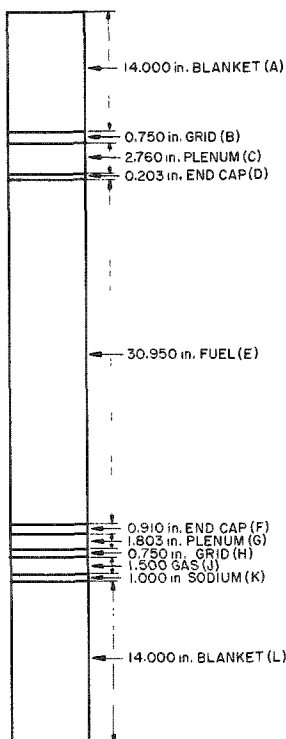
Regional Dimensions of Fermi Core A Fuel Subassembly
